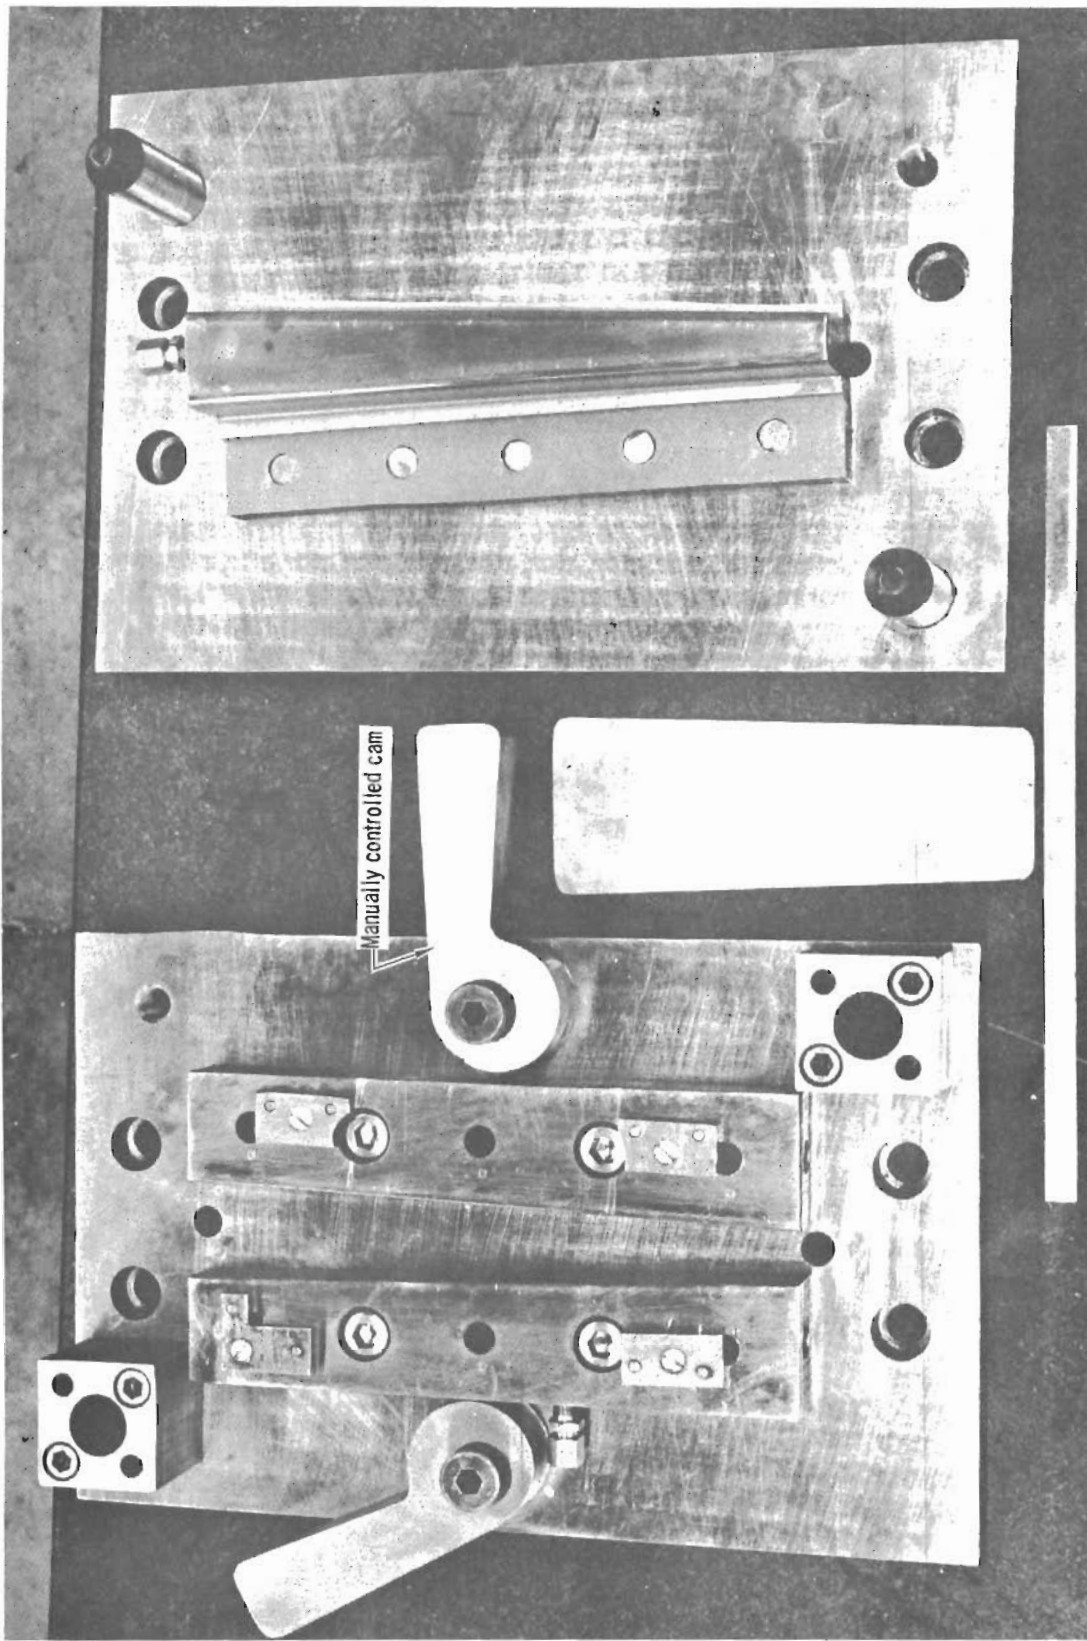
Mated Hot Forming Die for Rib with Closed Angle Flanges
